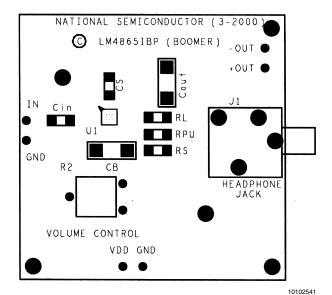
Recommended micro SMD PC board layout: component side silkscreen
